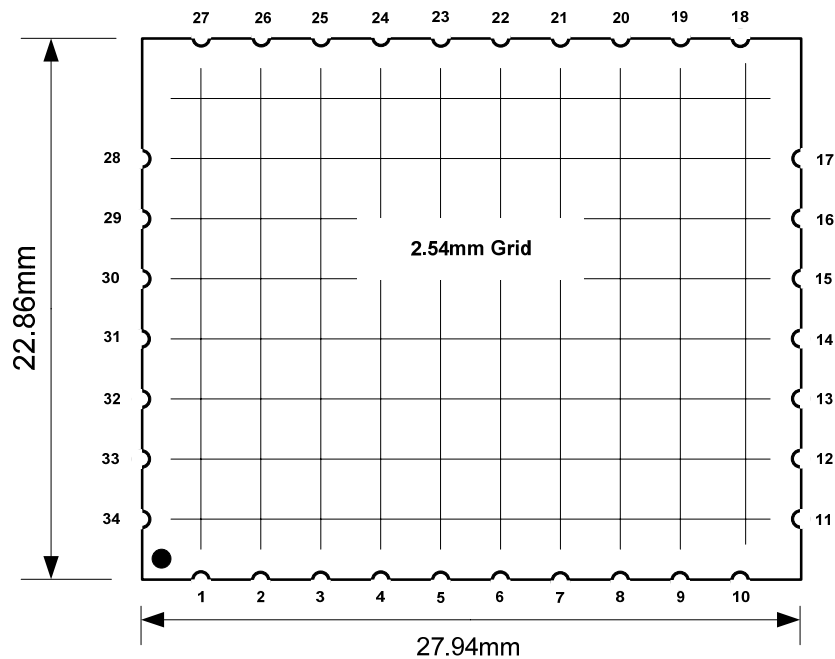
Mechanical Dimensions, Top View MRD2 SMD module
